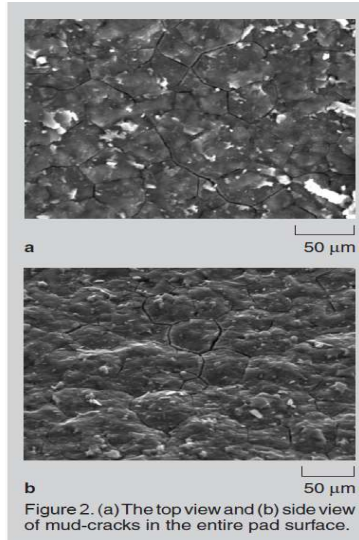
(a) The top view and (b) side view of mud-cracks in the entire pad surface.
